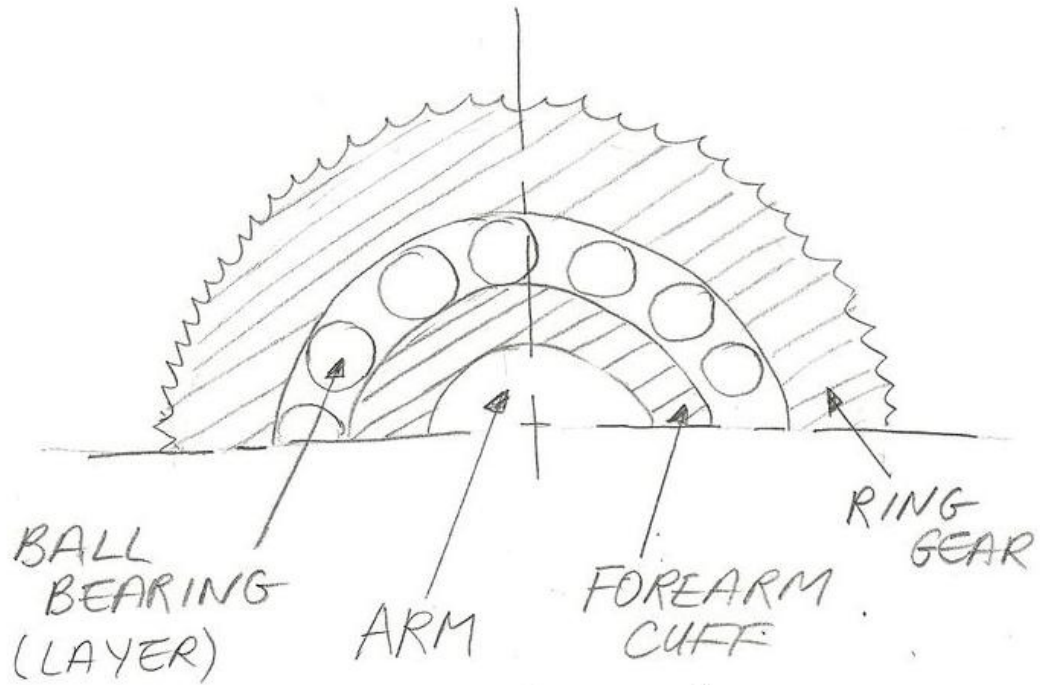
Cross-section showing layers of forearm holder in theoretical design
